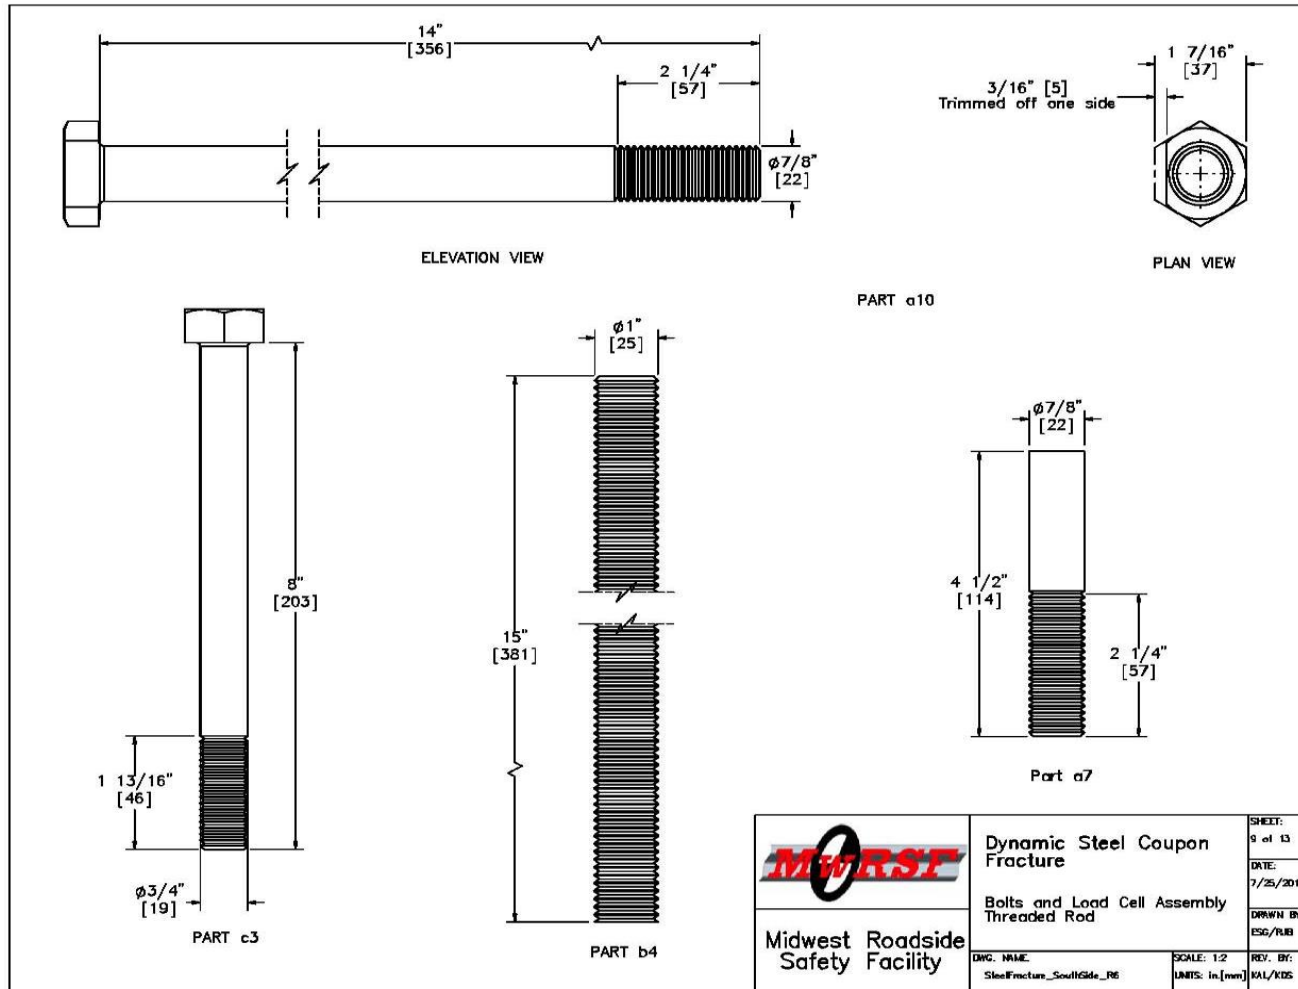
Bolts and Threaded Rod of the Load Cell Assembly
